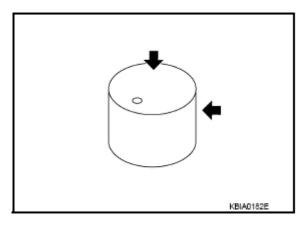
Locating Valve Lifter (INT) Inspection Points Courtesy of NISSAN NORTH AMERICA, INC.
